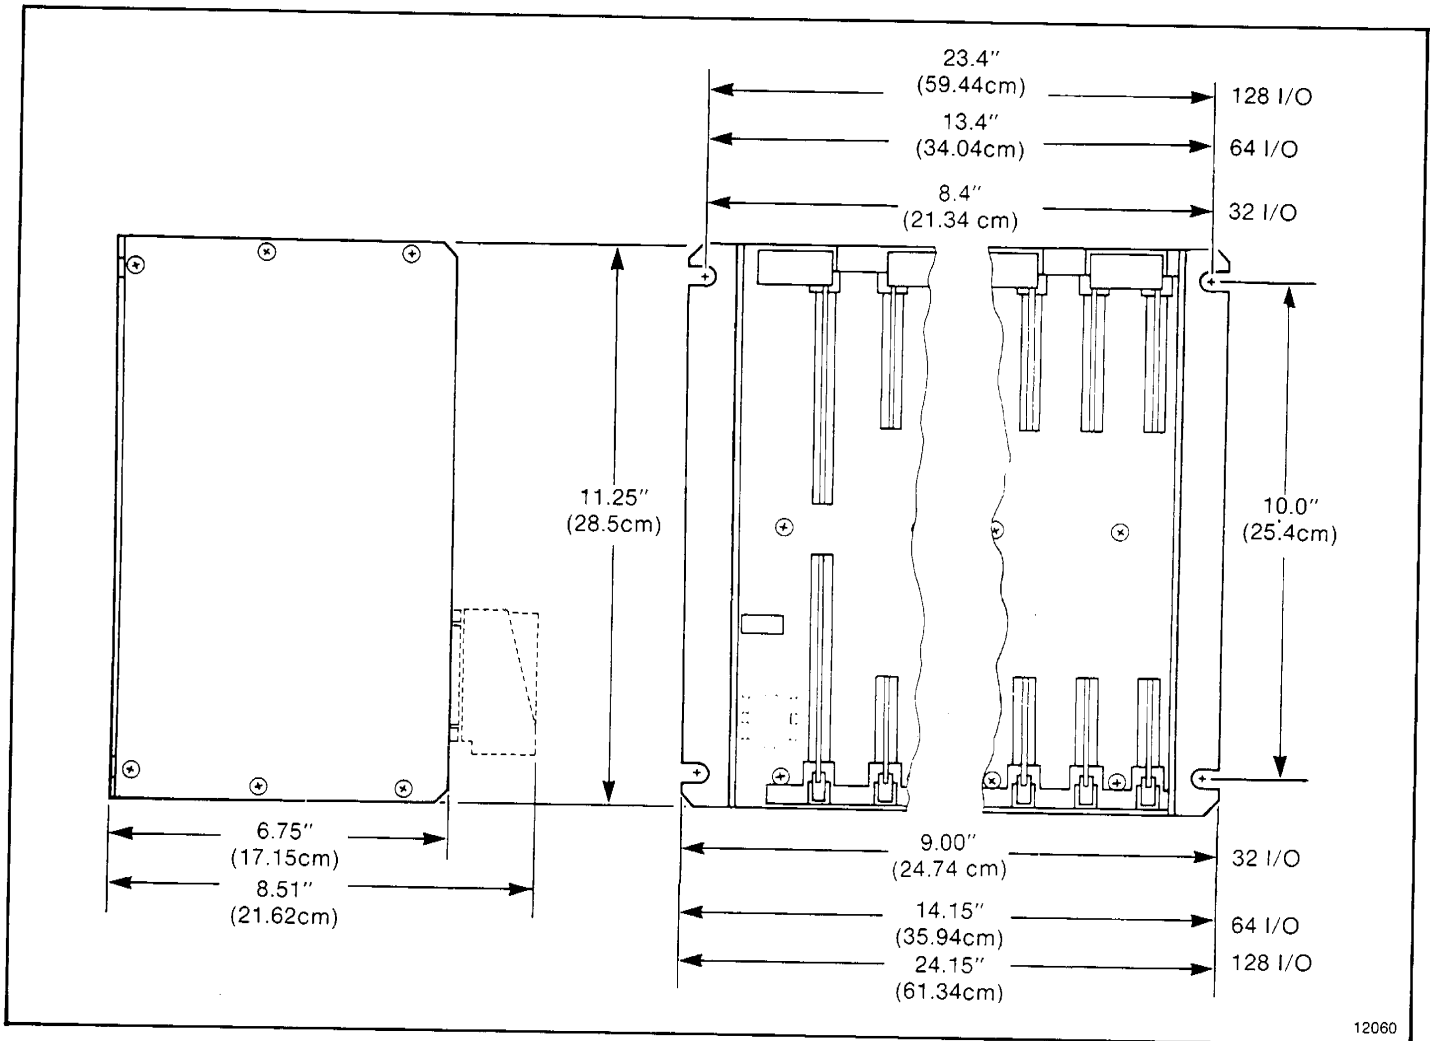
Dimensions for I/O Chassis (cat. no. 1771-A1, -A2, -A4)
